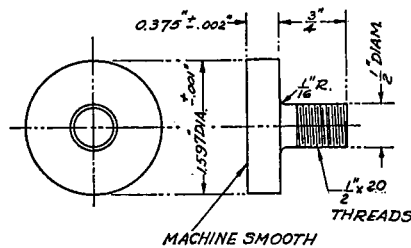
Metal part of specimen for testing metal-to-rubber adhesives.
